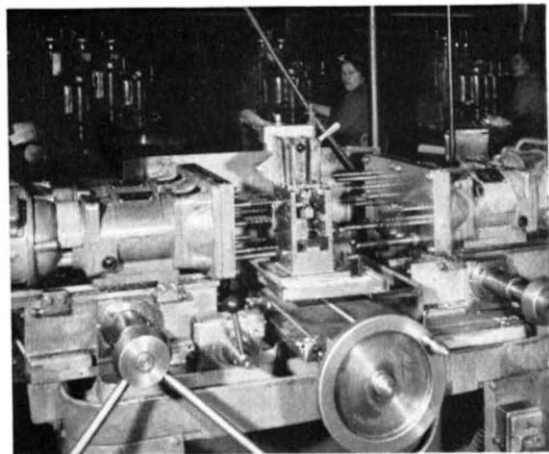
Automatic multiple driller. (Courtesy of General Electric Co. Ltd.)
